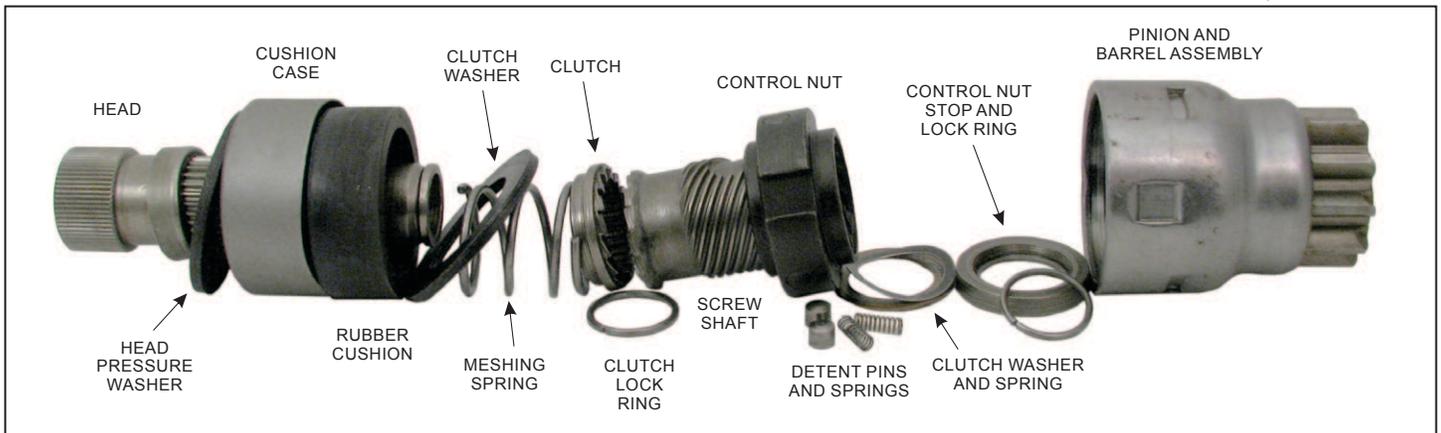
Disassembled large-body rubber-cushioned Folo-Thru drive.
